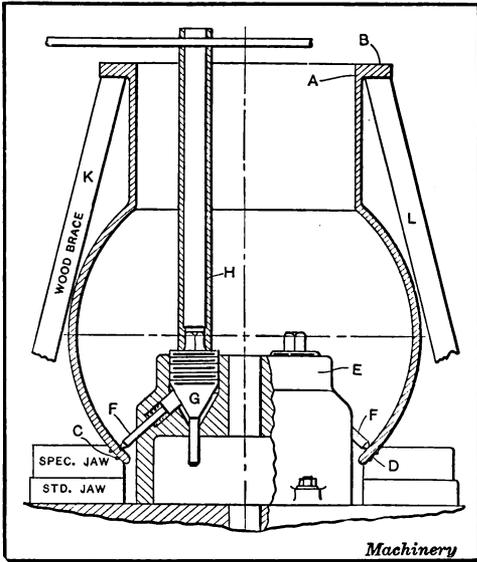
Vertical Boring Mill Fixture for holding Large Ball Joint
